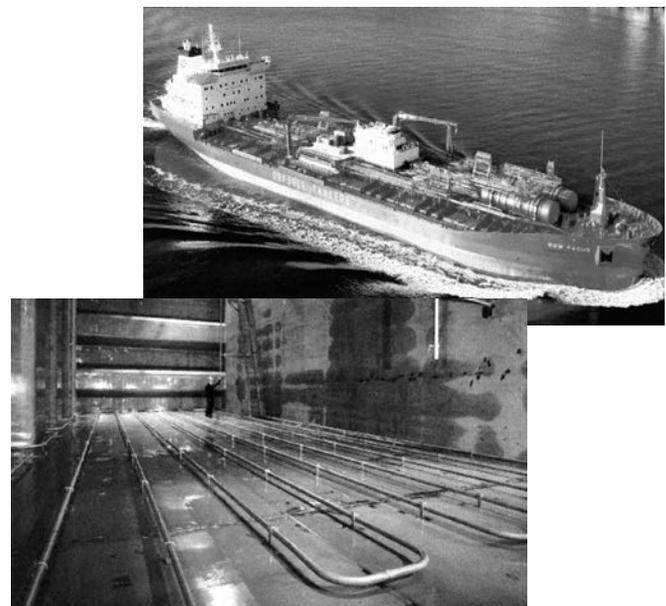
An application of DW-316LP: welding a storage tank (bottom) of a chemical tanker (top) with full penetration in all positions.
